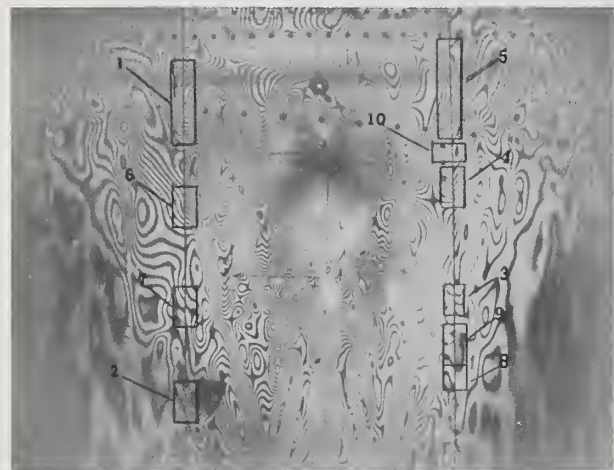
Fringe pattern on 48.50" x 25.50" panel obtained using the pulsed holographic inspection technique. (The areas of stress corrosion cracking are indicated.)
